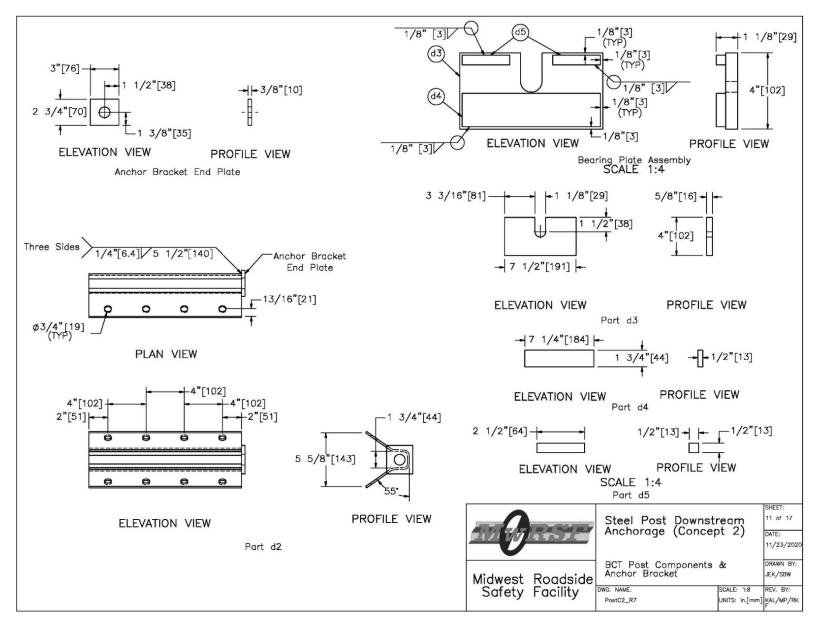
BCT Post Components and Anchor Bracket Details, Test No. SPDA-2
